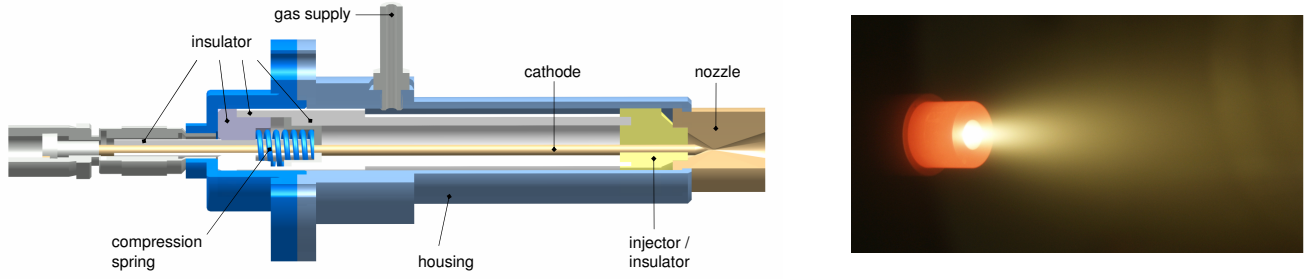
Sectional drawing of thruster (*left*) and thruster during operation (*right*)
